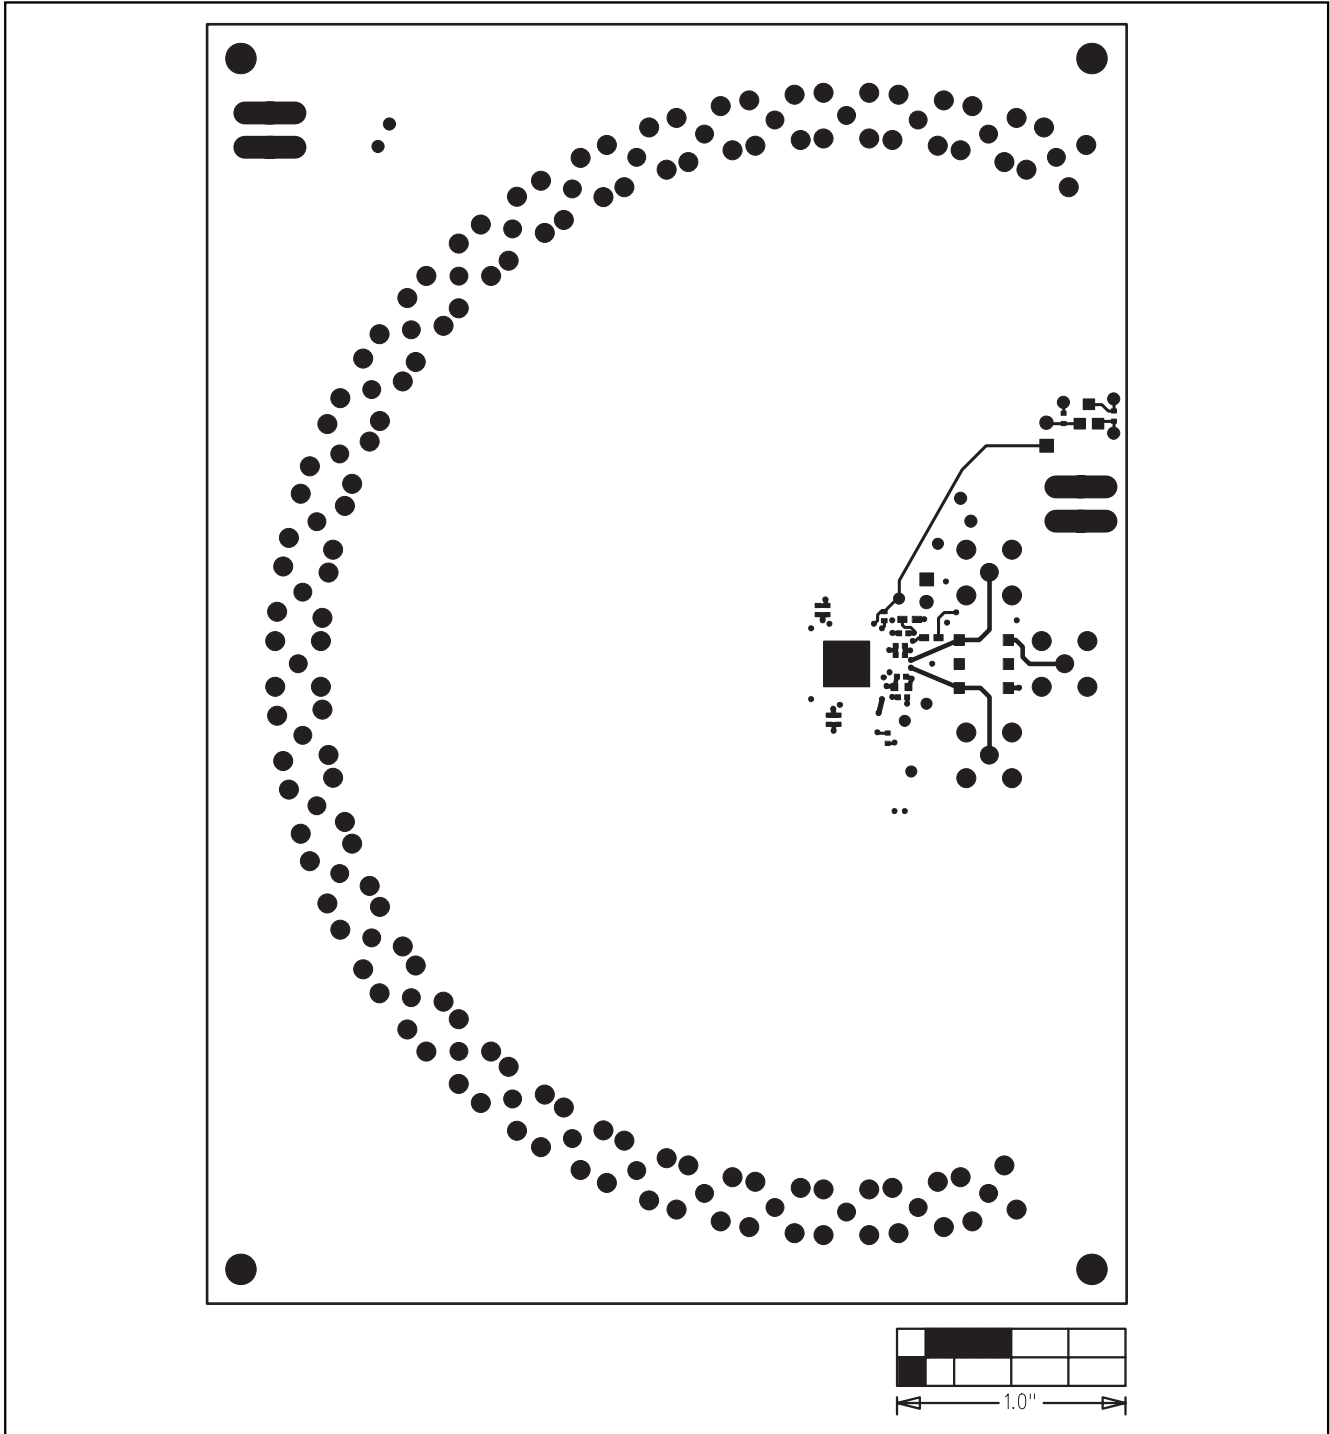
MAX5195 EV Kit PC Board Layout—Solder Side
